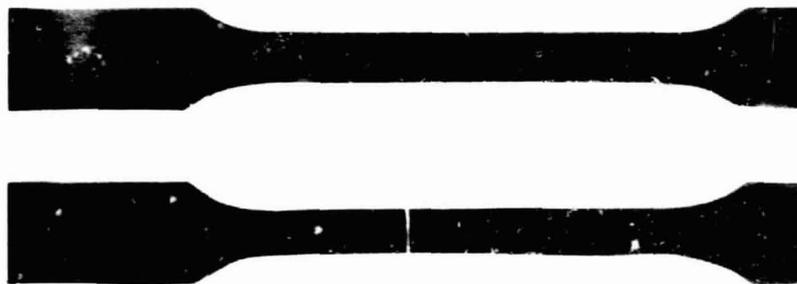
The Typical Configuration of Blade Sample Cross-Section Reduction and a Typical Fatigue Fracture of the Tested Blade Sample
